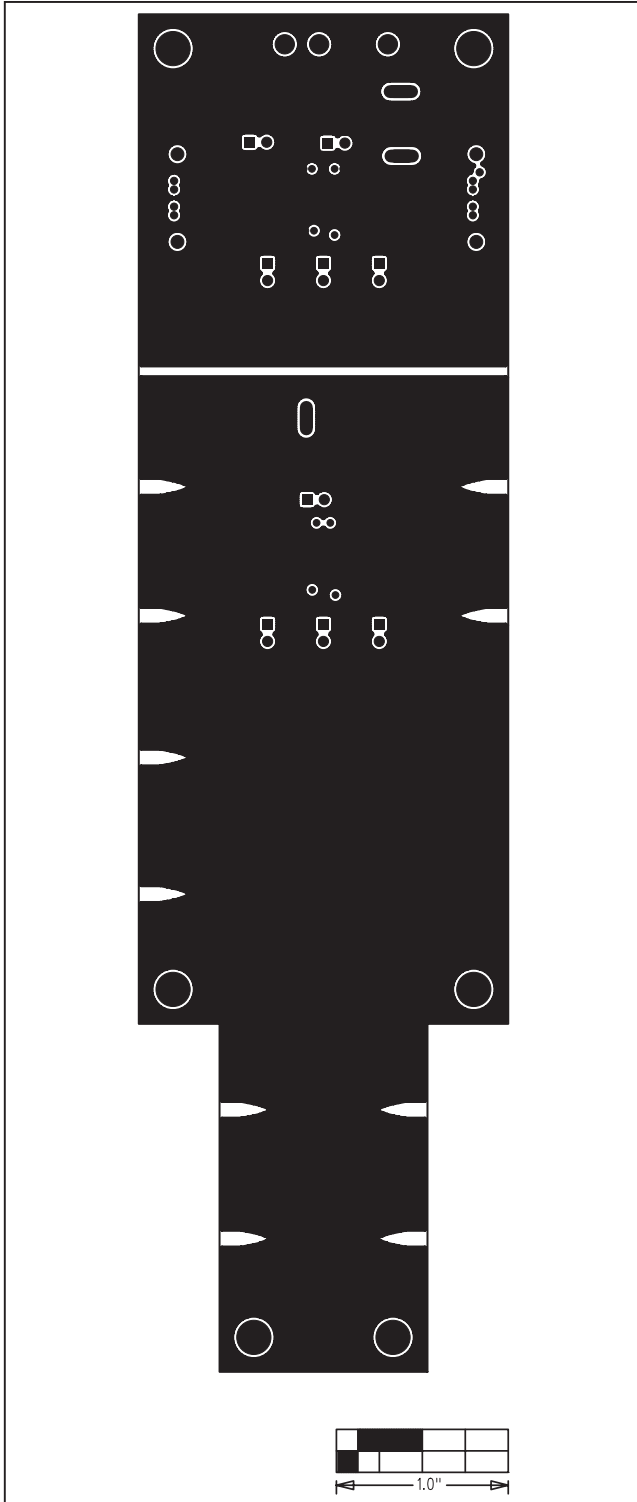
MAX4951B EV Kit PCB Layout—Inner Layer 2
